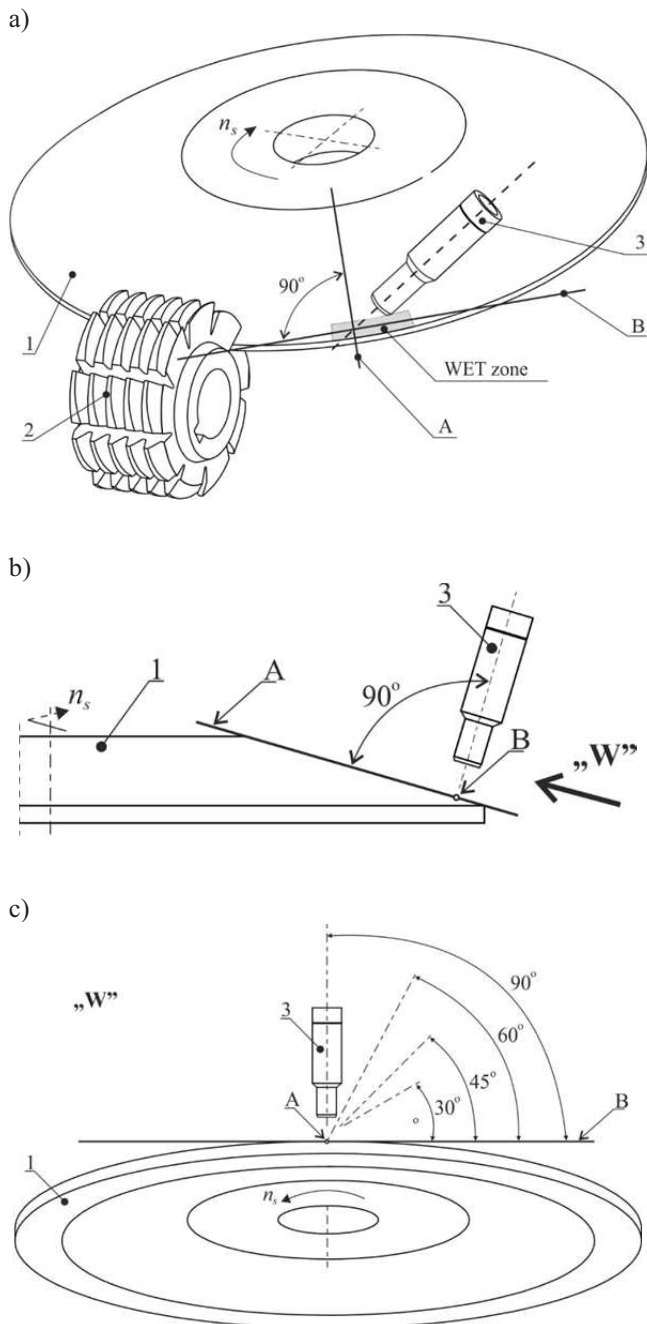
The angular distribution of the nozzle relative to the grinding wheel active surface: a) general view, b) setting the nozzle against line A, c) setting the nozzle against line B; 1 – grinding wheel, 2 – hob cutter, 3 – nozzle, A – line determined by generatrix of the grinding wheel cone, B – line tangent to the grinding wheel active surface
